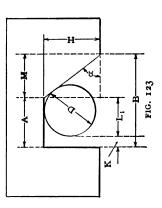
illustrates a gage for the gib shown in Fig. 121. The required measurement in this case is K, which can be easily obtained. Use
